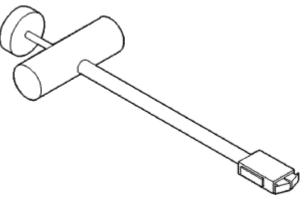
Valve Tappet Courtesy of CHRYSLER LLC
